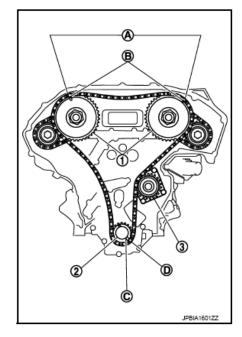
Identifying Timing Chain Matching Marks And Camshaft Sprocket Related Components
